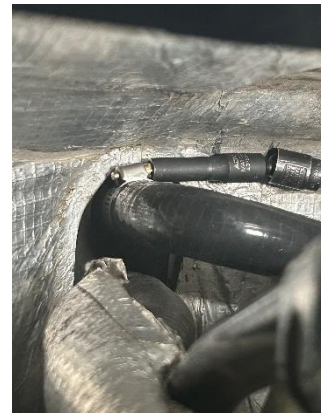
New Fleece heater core line installed, included hose clamp installed.
